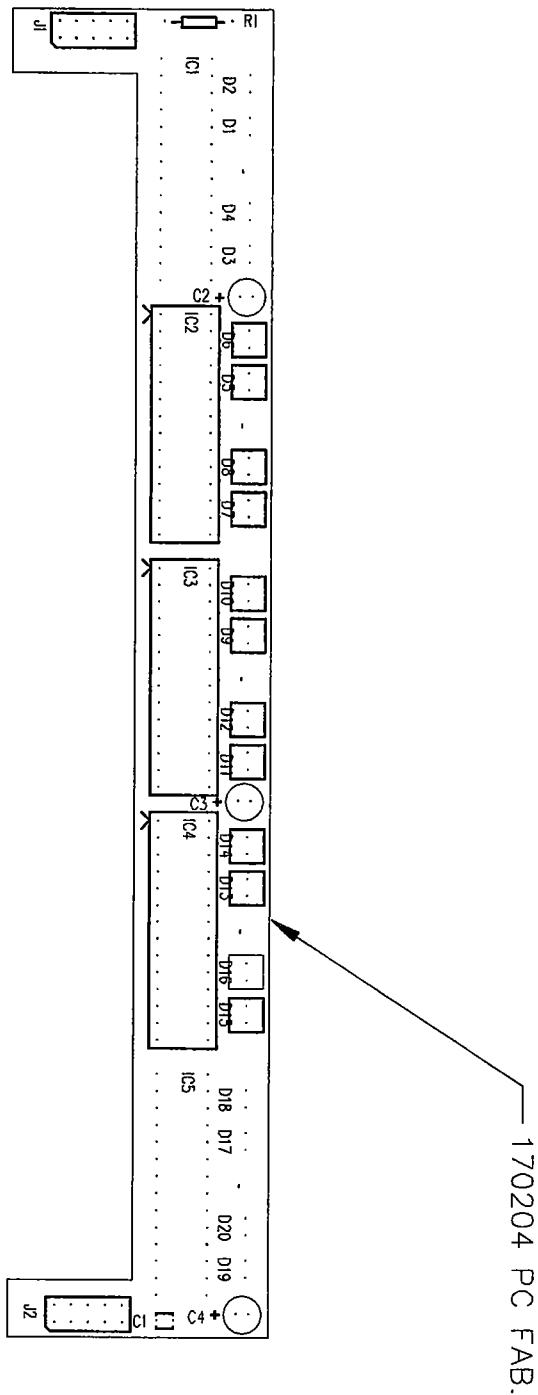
Assembly Drawing—ICS-52/52T
